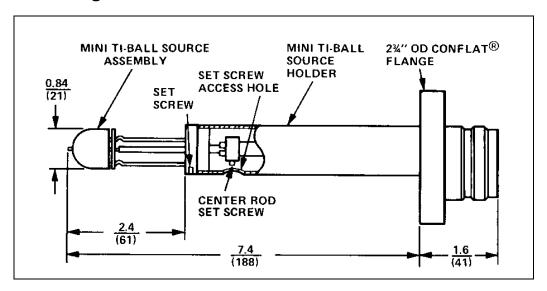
Mini Ti-Ball™ Source Assembly, Model No. 916-0009, Dimension Drawing
